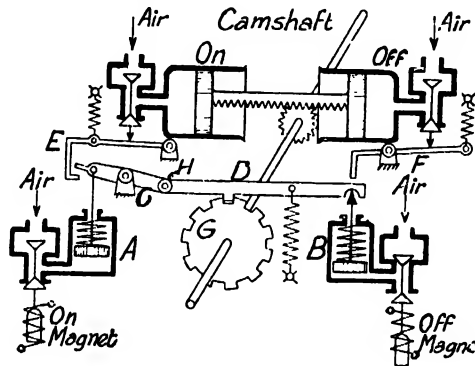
Arrangement of Electro-pneumatic Operating Mechanism of Brown-Boveri Camshaft Controller.
